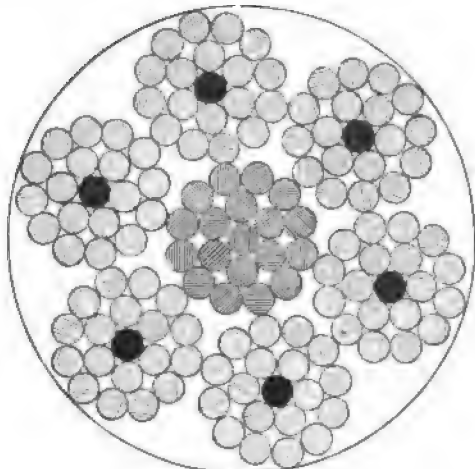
Cross-section of wire rope of 133 wires (full size).
